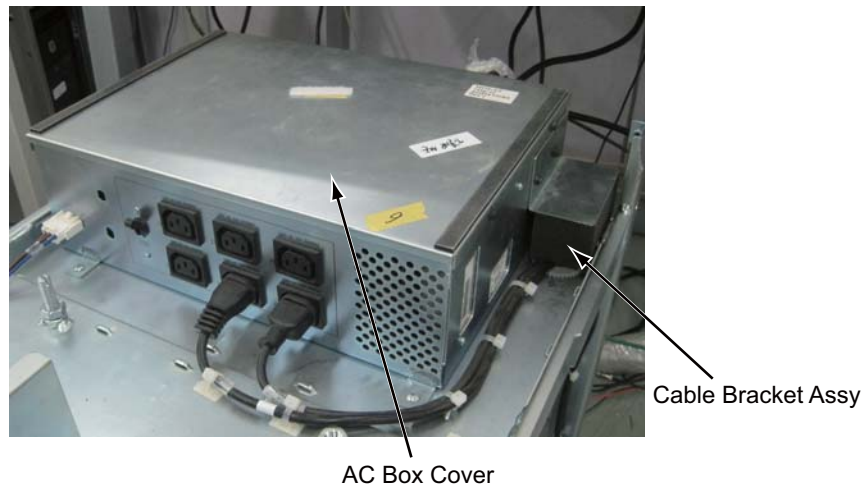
AC Box Top Cover and Cable Bracket Removal
